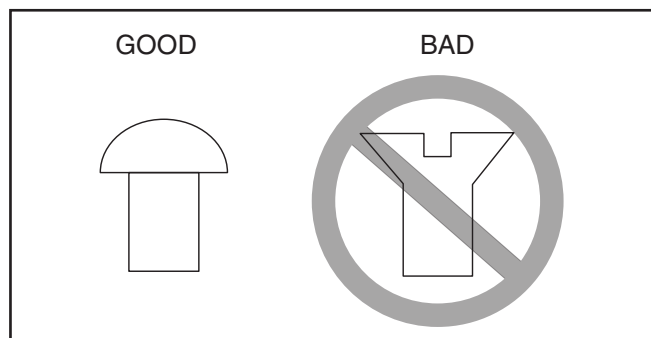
Correct and incorrect screw types for mounting faceplate to workpiece.
